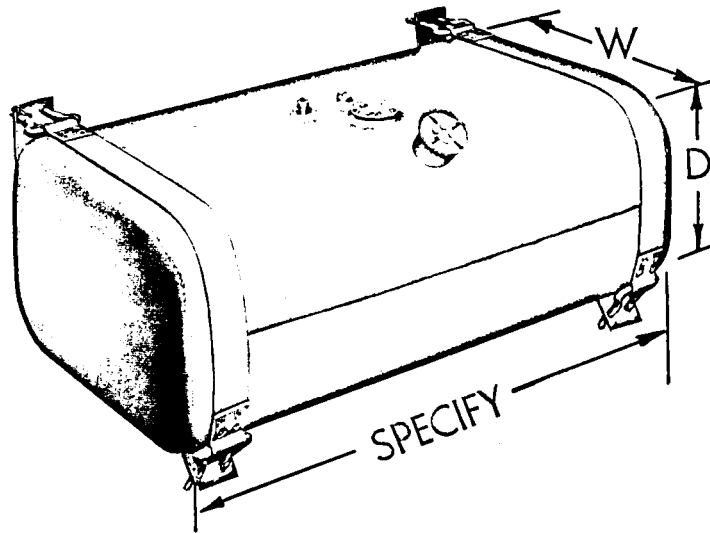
Universal Cylinder Tanks - Steel and Aluminum
